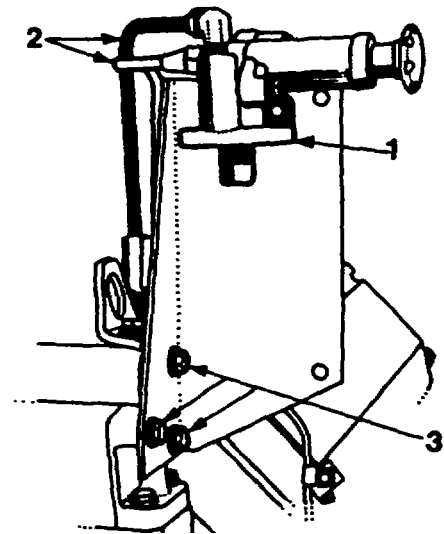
Removing Primer Pump and Filter Mounting Bracket Assembly
